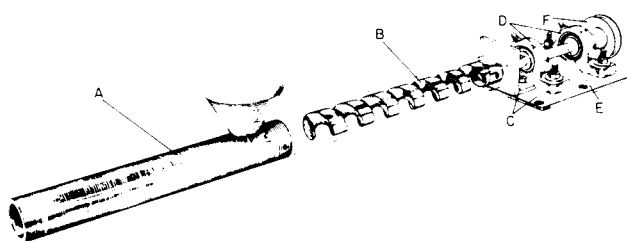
Auger conveyor for metering granular baits: (A) auger housing tube with funnel; (B) auger; (C) support plates; (D) pillow block bearings; (E) shaft; (F) pulley.
